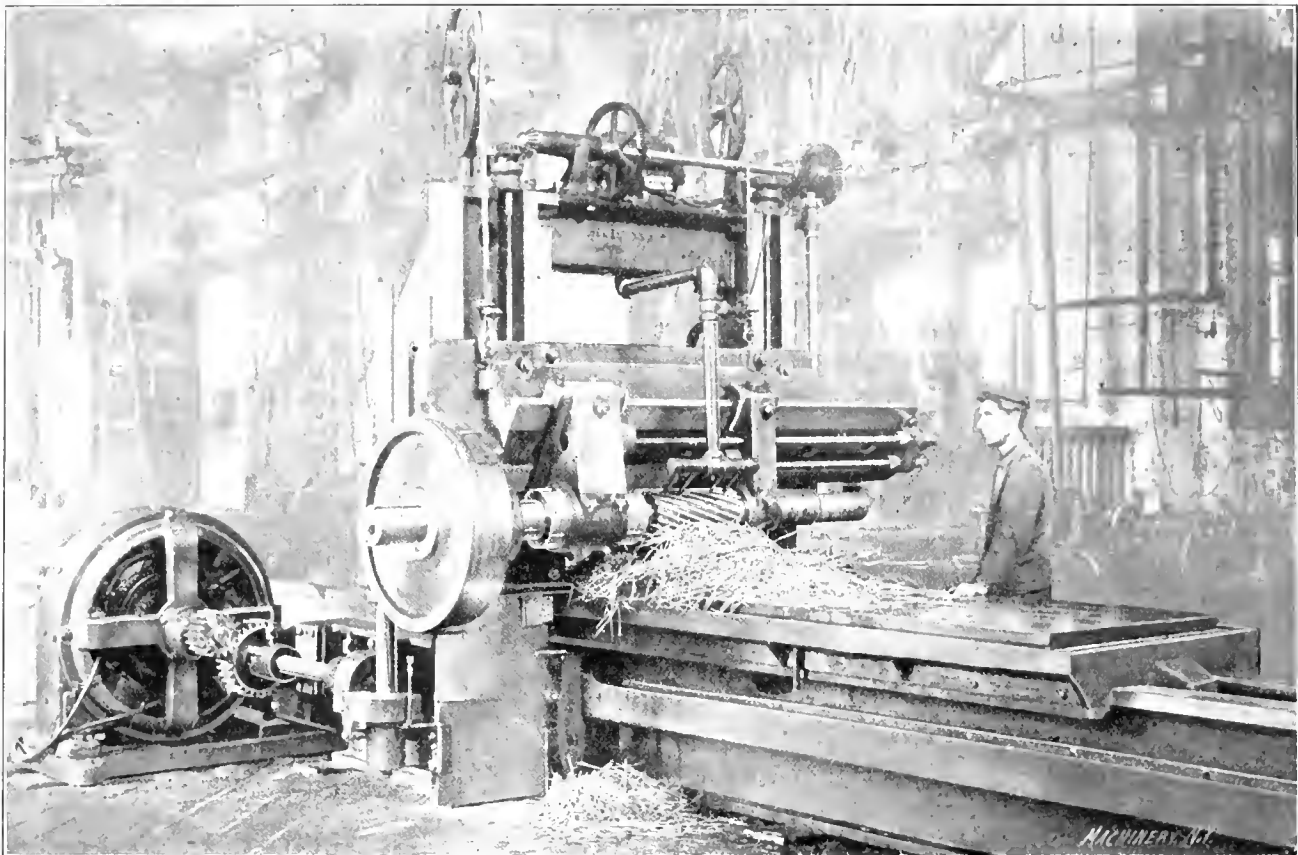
High-speed Milling Cutter in use on High-power Milling Machine of the Planer Type.
